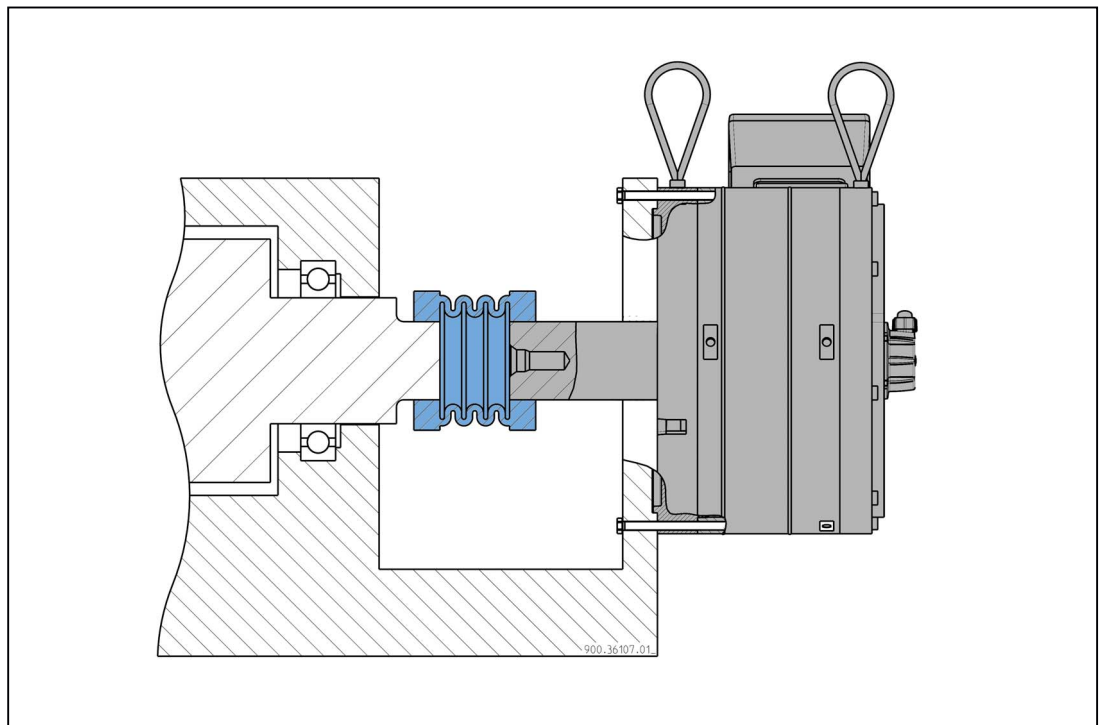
De-coupling the machine shaft from the motor shaft using a coupling
